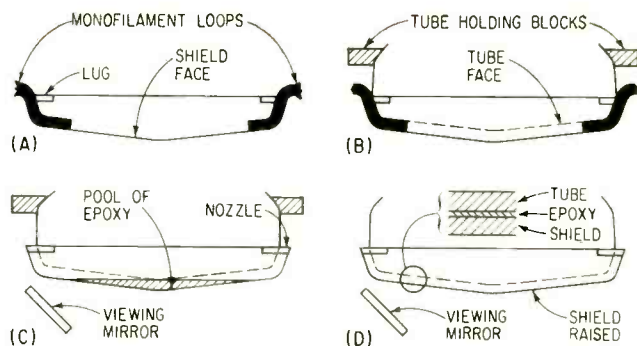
Fixture provides space between tube and shield. After bonding resin is inserted, shield is raised to complete lamination
